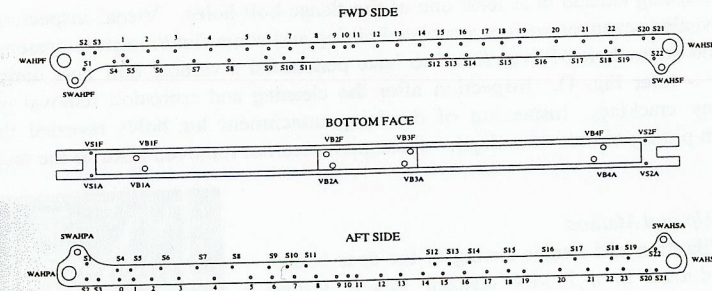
Schematic drawing of the lower centre-section spar boom showing the hole numbering system used in AMRL investigations.
